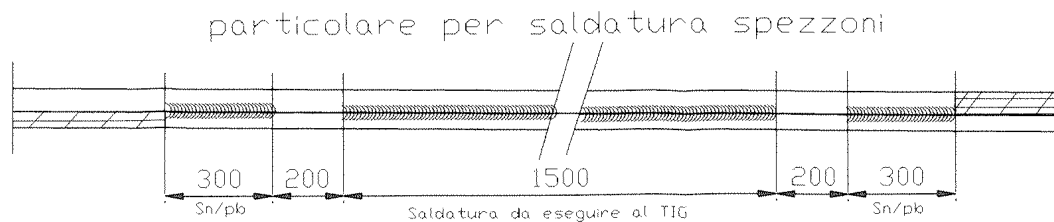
Internal splices (extracted from the original Ansaldo drawing): 1500 mm weld of aluminum edges + 200 mm gap + 300 mm solder of aluminum faces on both sides of the weld. The welding was done with the TIG (Tungsten Inert Gas) technique.
